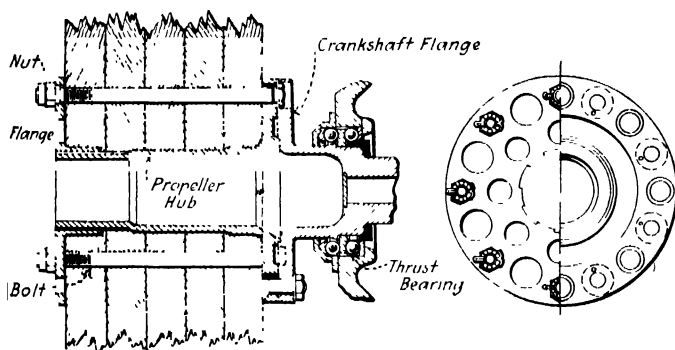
Propeller Hub of German Design is of Light but Strong Construction and Attaches to a Flange on Crankshaft.
